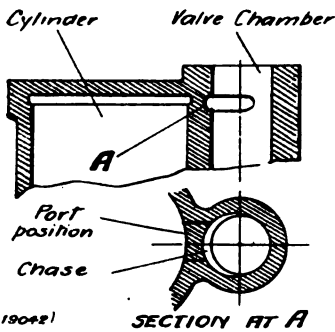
CUTTING CHASE IN VALVE CHAMBER.
